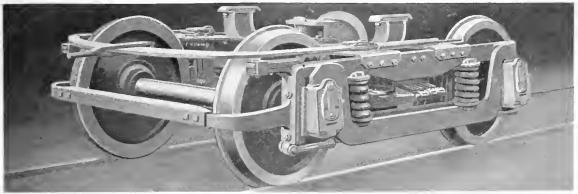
Motor Truck, No. 27-MCB, Solid Forged Side Frames.
